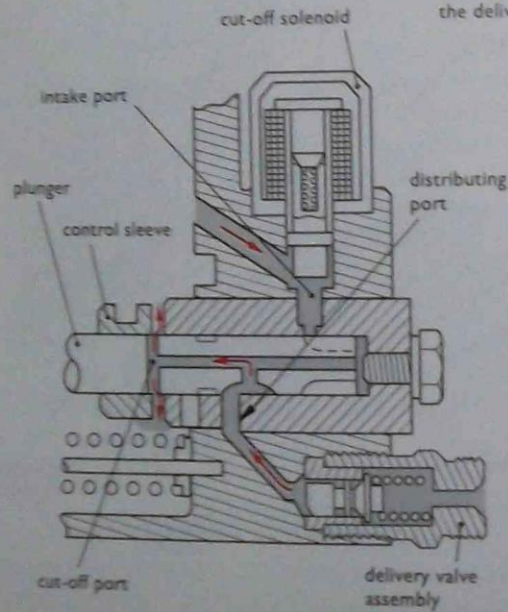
Pumping section of a distributor pump ZEXEL
